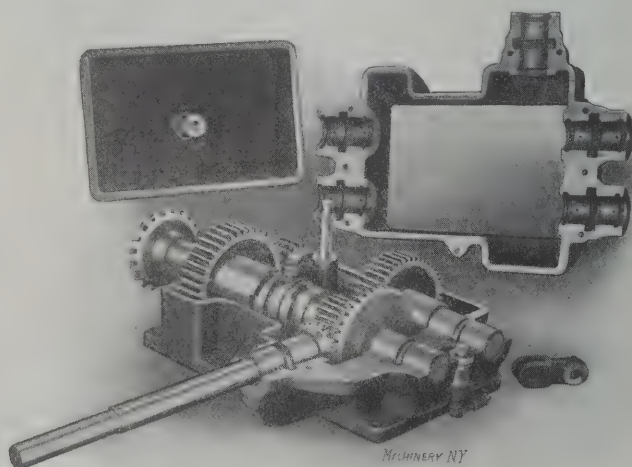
Speed Box, showing Enclosed Mechanism and Ring Oiling Bearings
